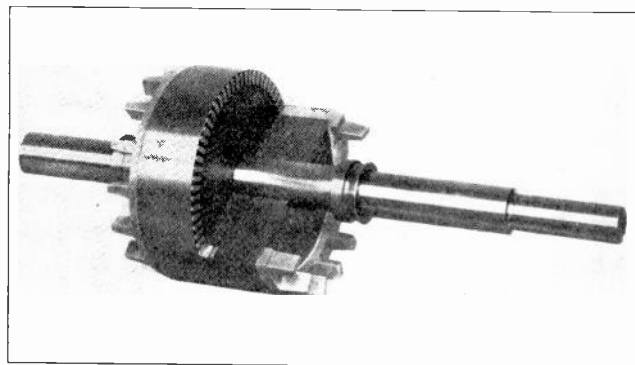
This view shows a sectional view of a squirrel-cage rotor for an A.C. induction motor. Note the manner in which the copper bars are imbedded in the surface of the core.
